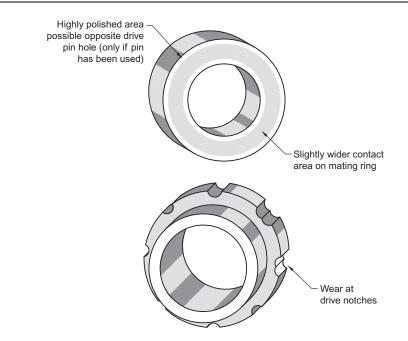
Mechanical seal contact pattern due to out-of-square mating ring.
